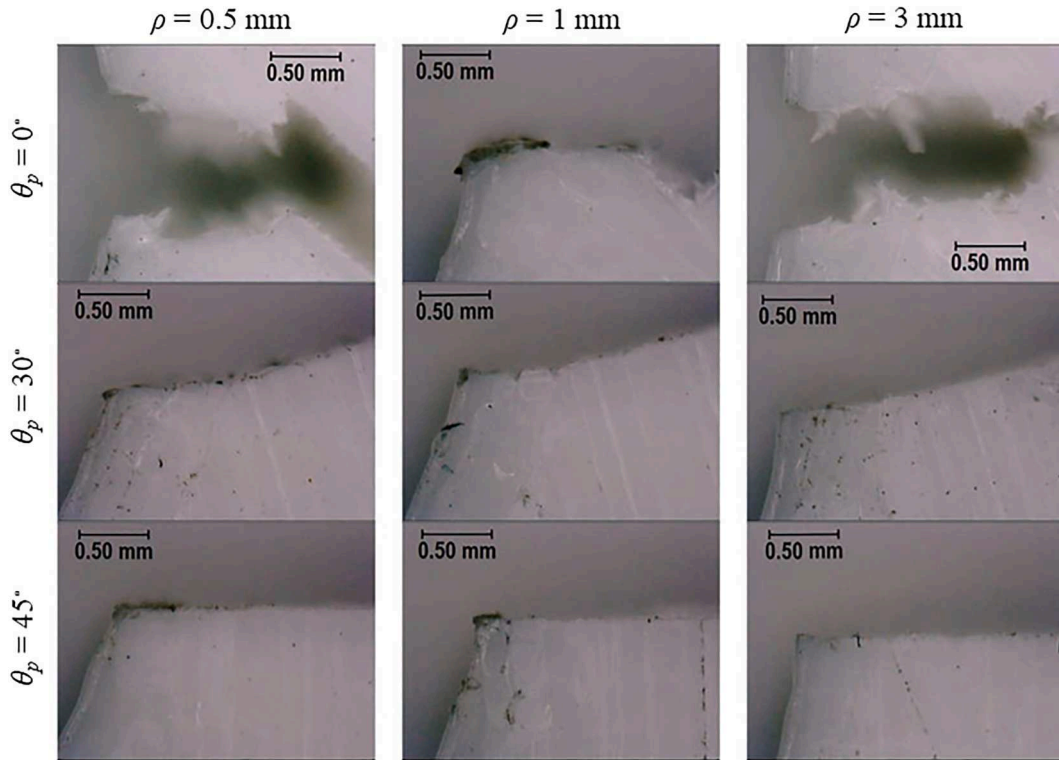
Photographs from the fracture surfaces taken from [33]. The change from ductile to brittle fracture as the printing angle θ_p increases is remarkable.
